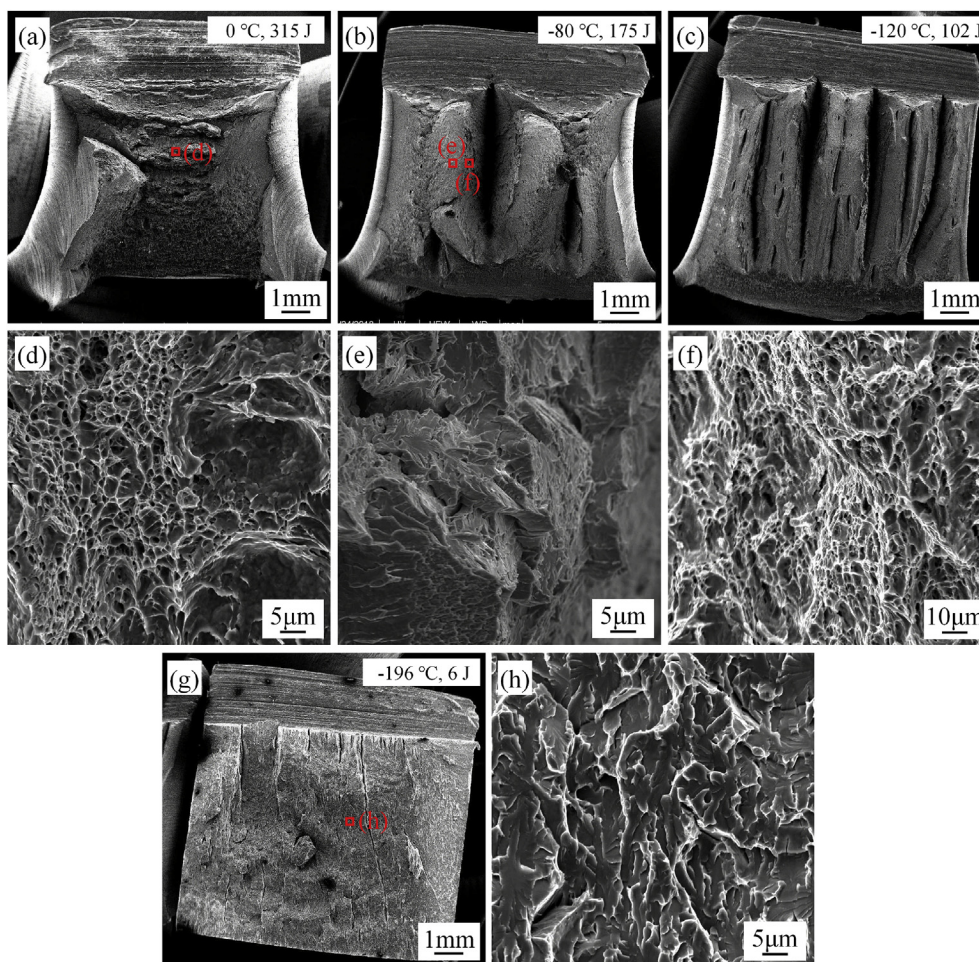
Fracture surfaces of specimens after the Charpy V-notch impact tests measured the toughness of the EUG steel plate along TD: (a) 0 °C; (b) –80 °C; (c) –120 °C; (d) enlarged view indicated in (a); (e) and (f) enlarged view indicated in (b); (g) –196 °C; (h) enlarged view indicated in (h).
